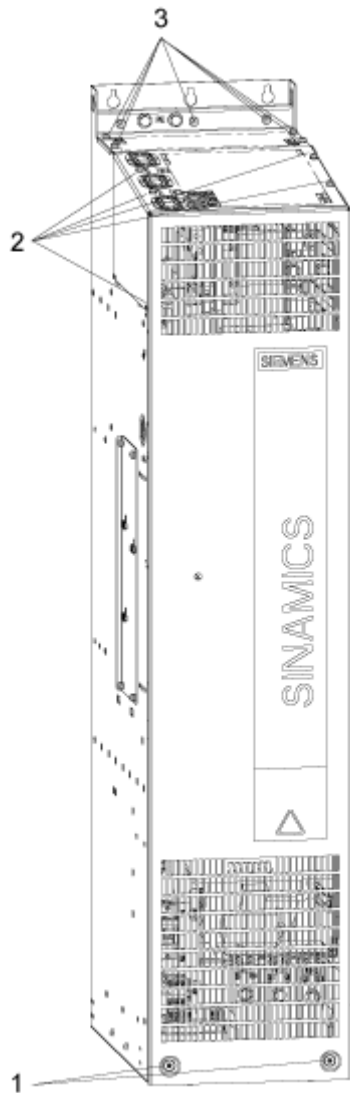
Installing the Braking Module in a Power Module frame size GX – steps 1 - 3
